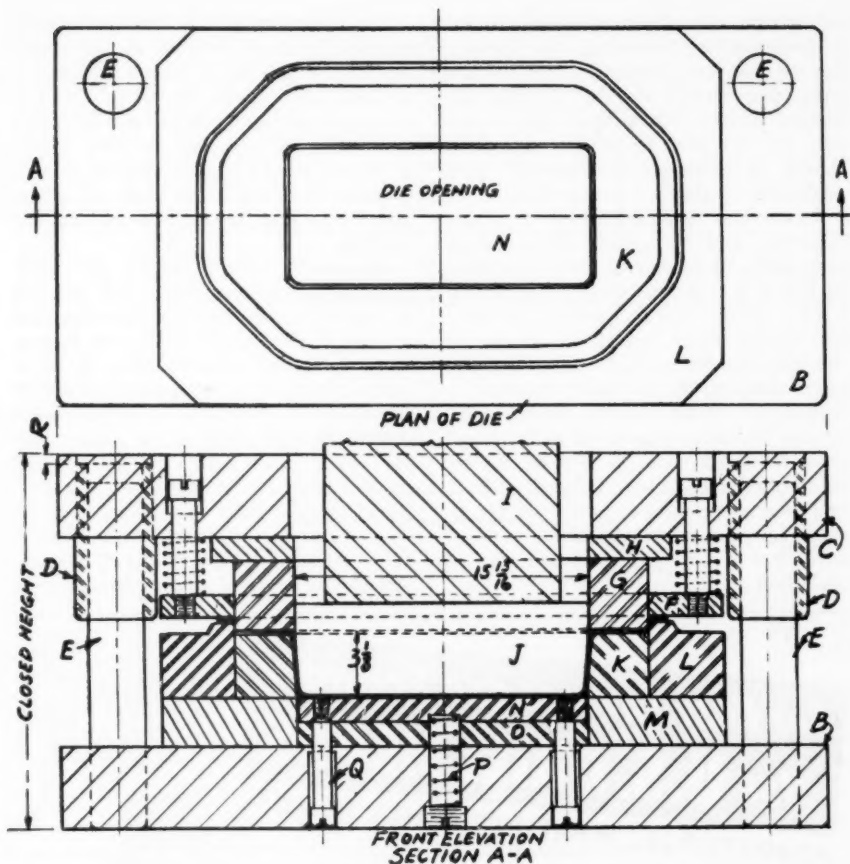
A double-action blanking and drawing die for producing the first draw of the aluminum alloy pan sketched in Fig. 2. This press tool is designed for use in the toggle drawing press seen in Fig. 3.
